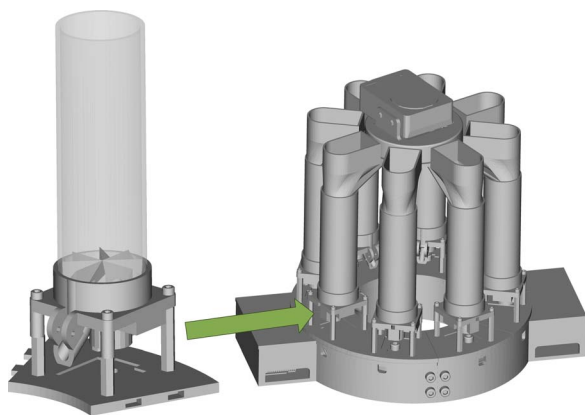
3D view of the design of a single dispenser head (left) and the full assembly (right), with eight dispenser heads mounted on top of the base and with ionizer on top.
